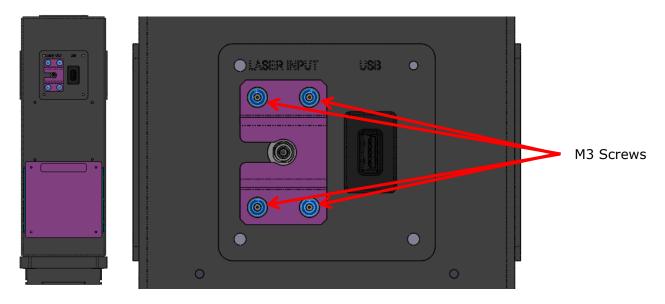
Fiber Locking Panel Fastener Locations (highlighted in blue)
